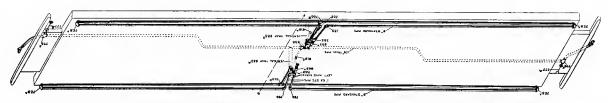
Arrangement of Piping and Connections for Direct Steam Heating System (L-811).
